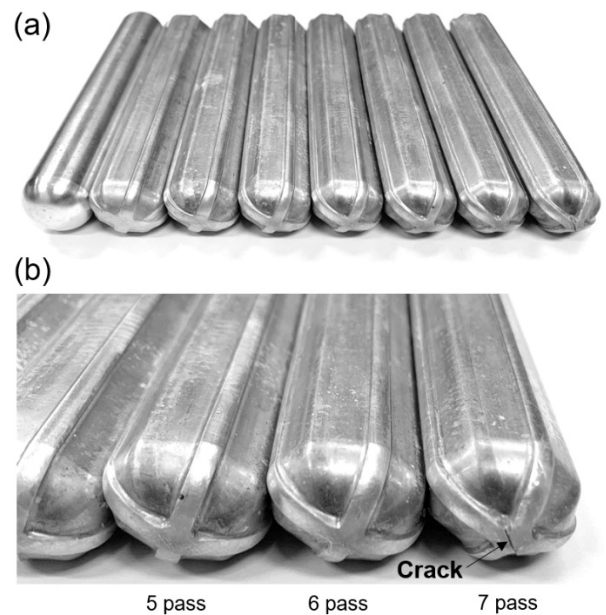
Appearance of workpieces depending on the number of forging passes after forging at 300°C
